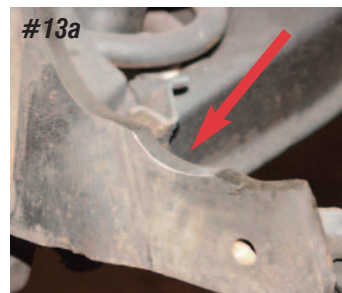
& 13b: Using a hand grinder and file we cut a half moon pocket in the disc brake bracket to clear the Wilwood caliper. With the bracket clearanced, we installed the brake rotor back onto the spindle and then installed the Wilwood caliper for the last time.
